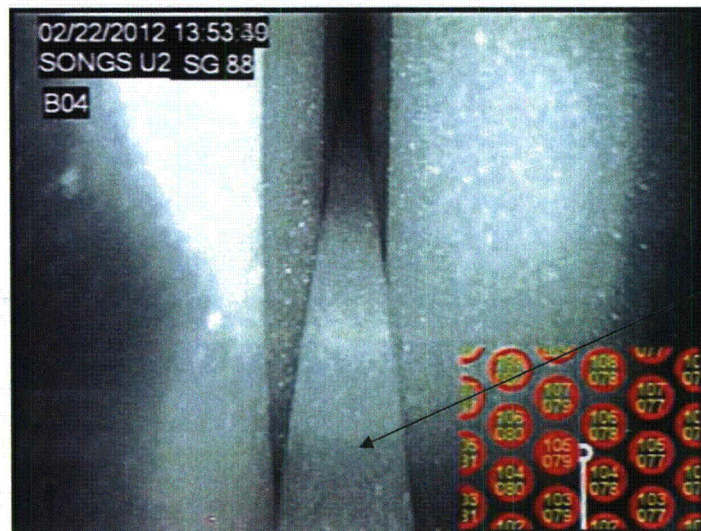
Tube Bundle Visual Inspection Image [Unit-2B]
